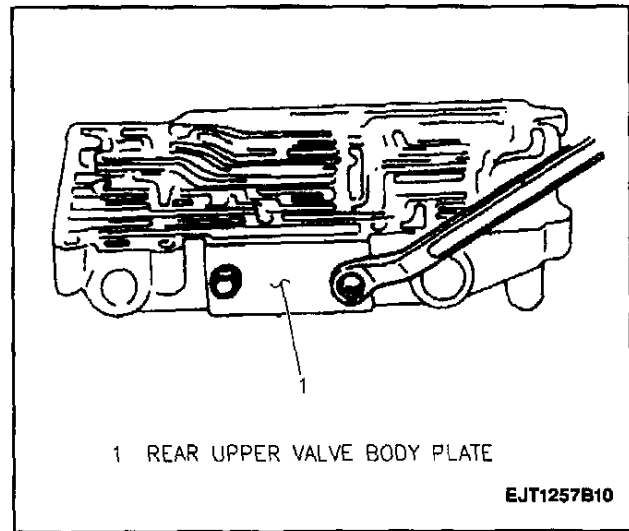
Removing Rear Upper Valve Body Plate (03-72LE, 4-Speed)
